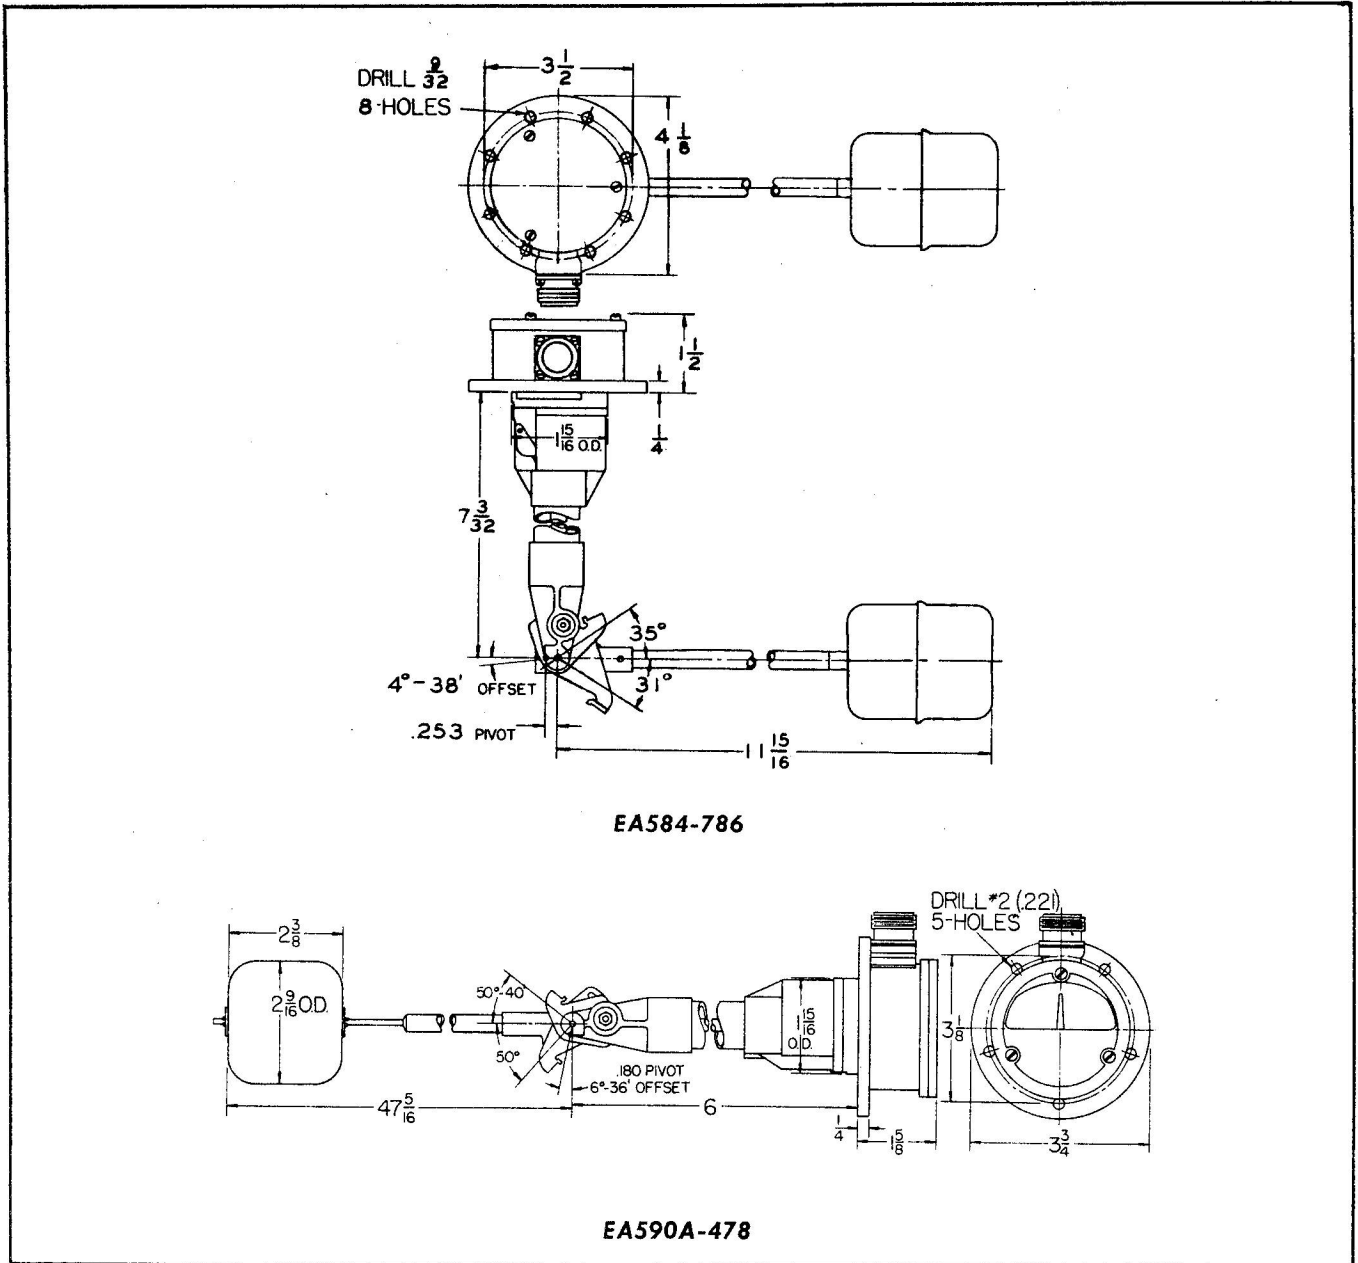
(Sheet 1 of 2 Sheets). General Dimensions
